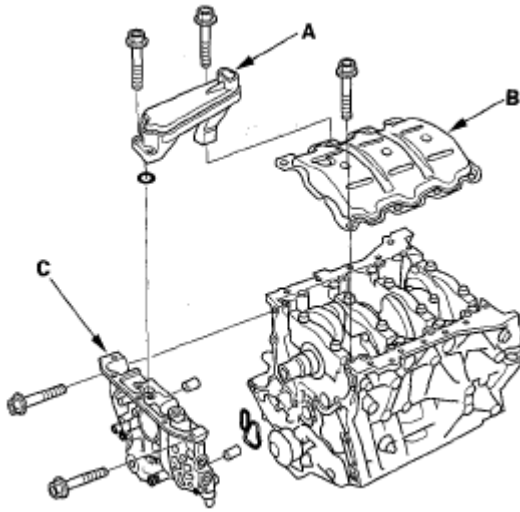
Identifying Oil Screen, Baffle Plate And Oil Pump
